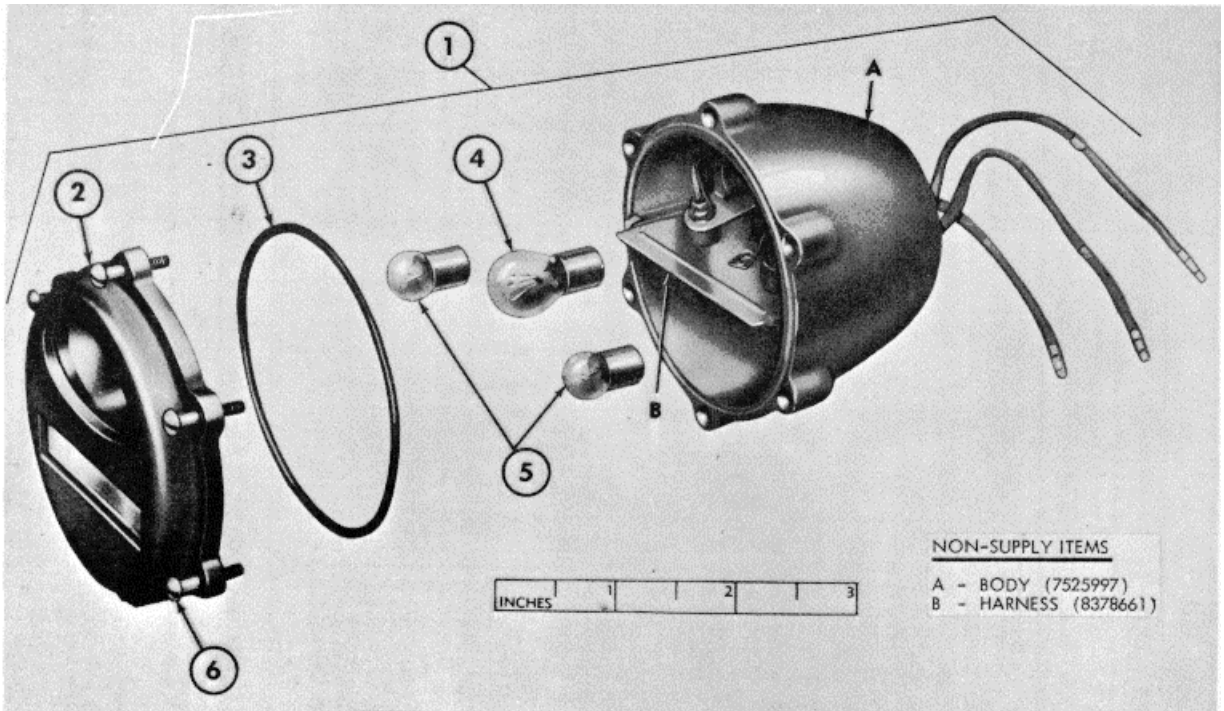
TAIL LIGHT ASSEMBLY (M131A2) - EXPLODED VIEW.
